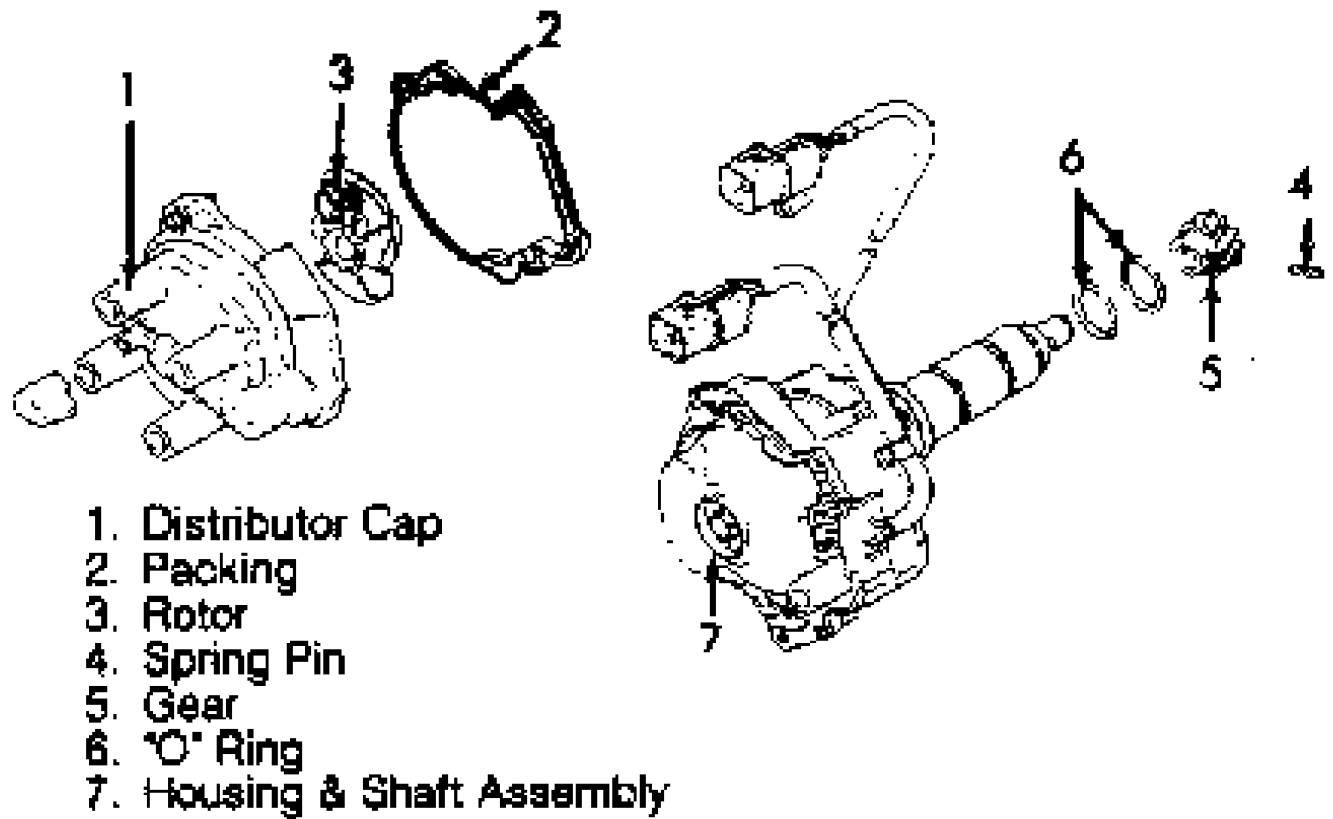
Exploded View of Distributor (Eclipse 1.8L)
